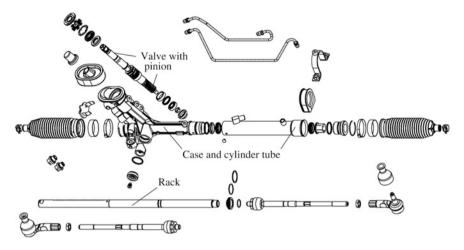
Main components of the hydraulic rack-and-pinion steering
